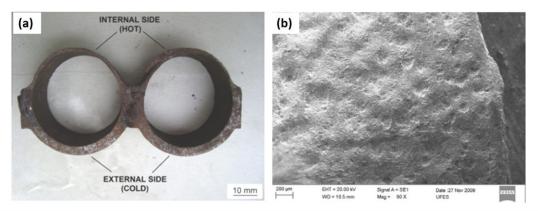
Erosion Failure (a) Photograph of boiler tube indicating erosion on fire side surface (b) SEM micrograph of eroded surface [11]
